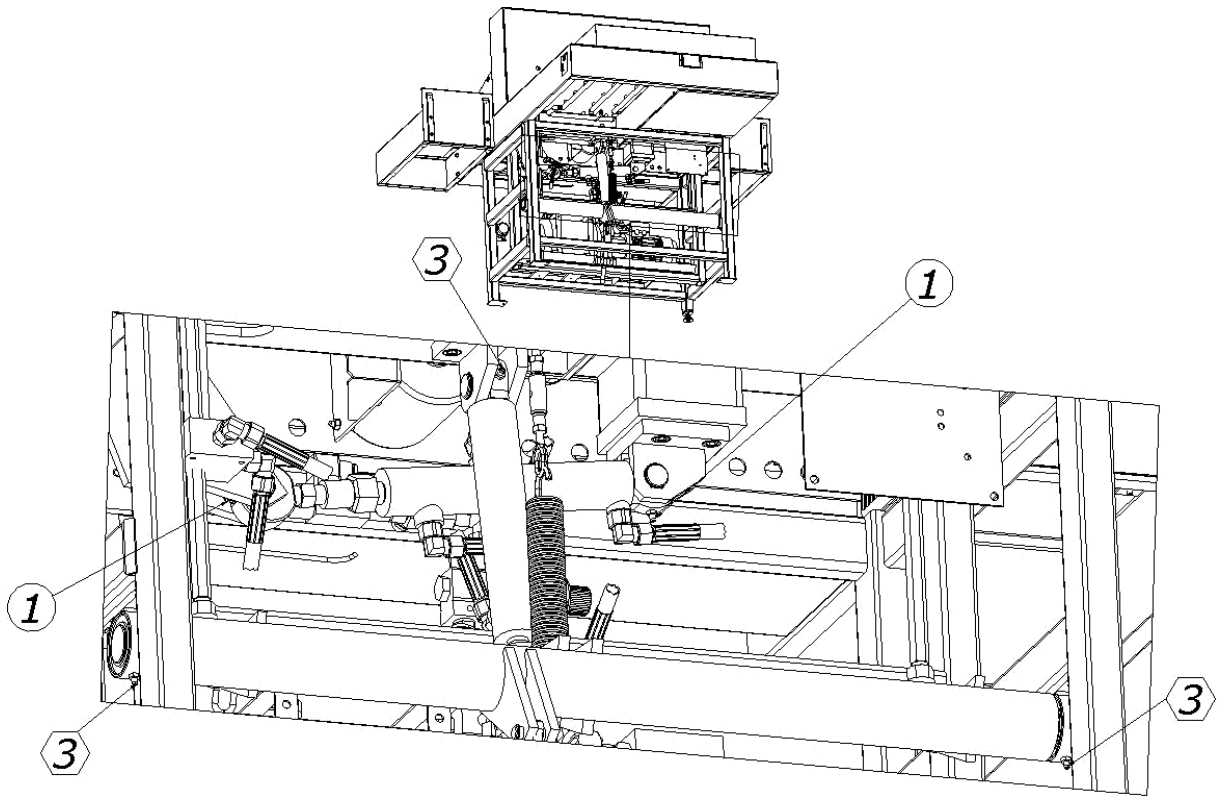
Lubrication point of the knife actuator (1), pressure cylinder and shaft actuator (3)
